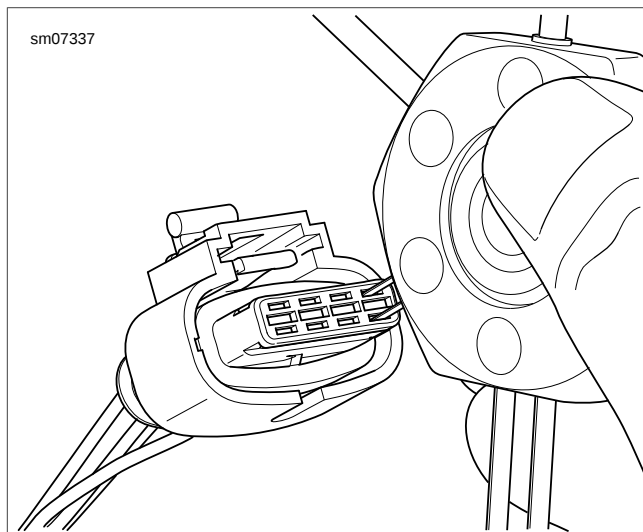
Terminal Removal: Bosch Compact 1.1M Connector
